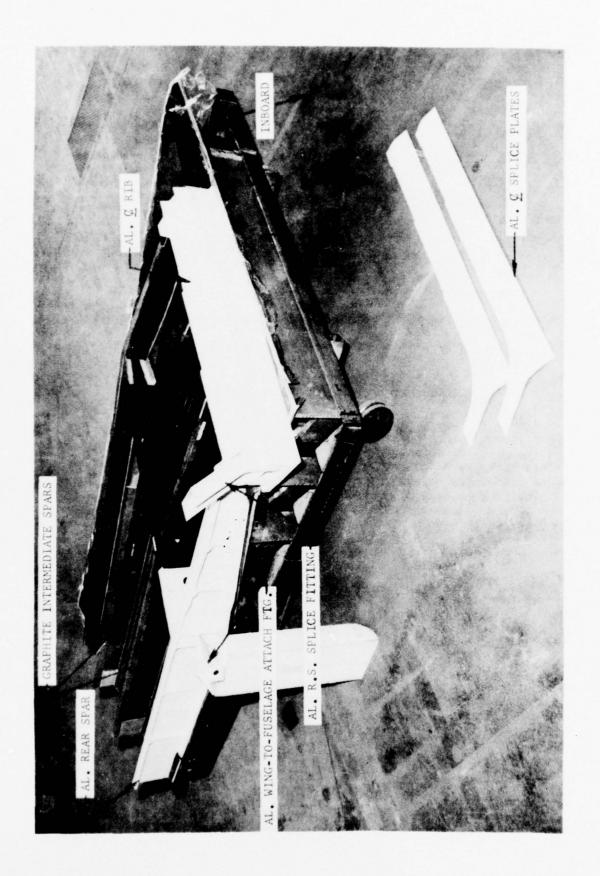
DETAIL PARTS - COMPOSITE WING CENTER SECTION SPECIMEN
